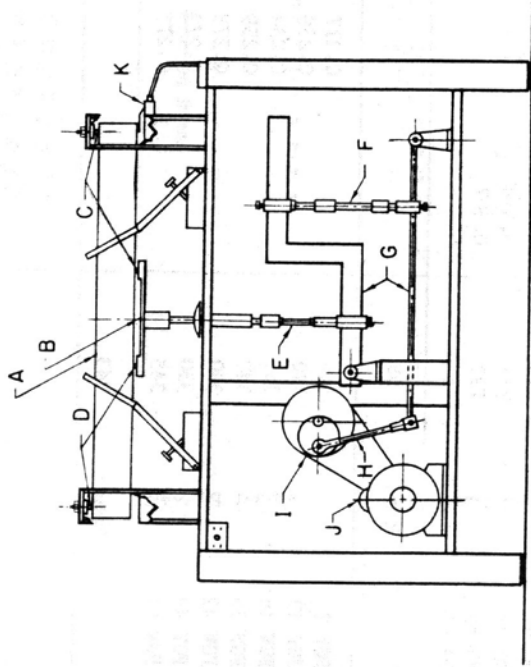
Schematic Diagram of Bending Fatigue Machine
